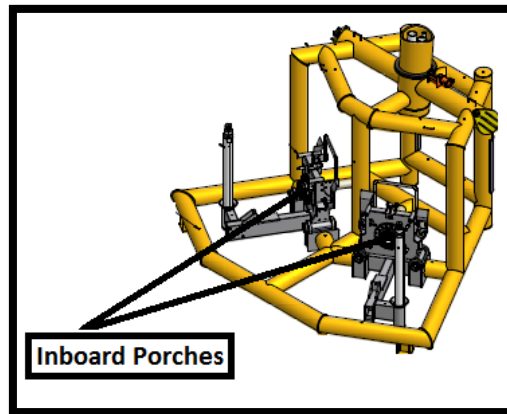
INBOARD PORCHES INSIDE PROTECTION FRAME
